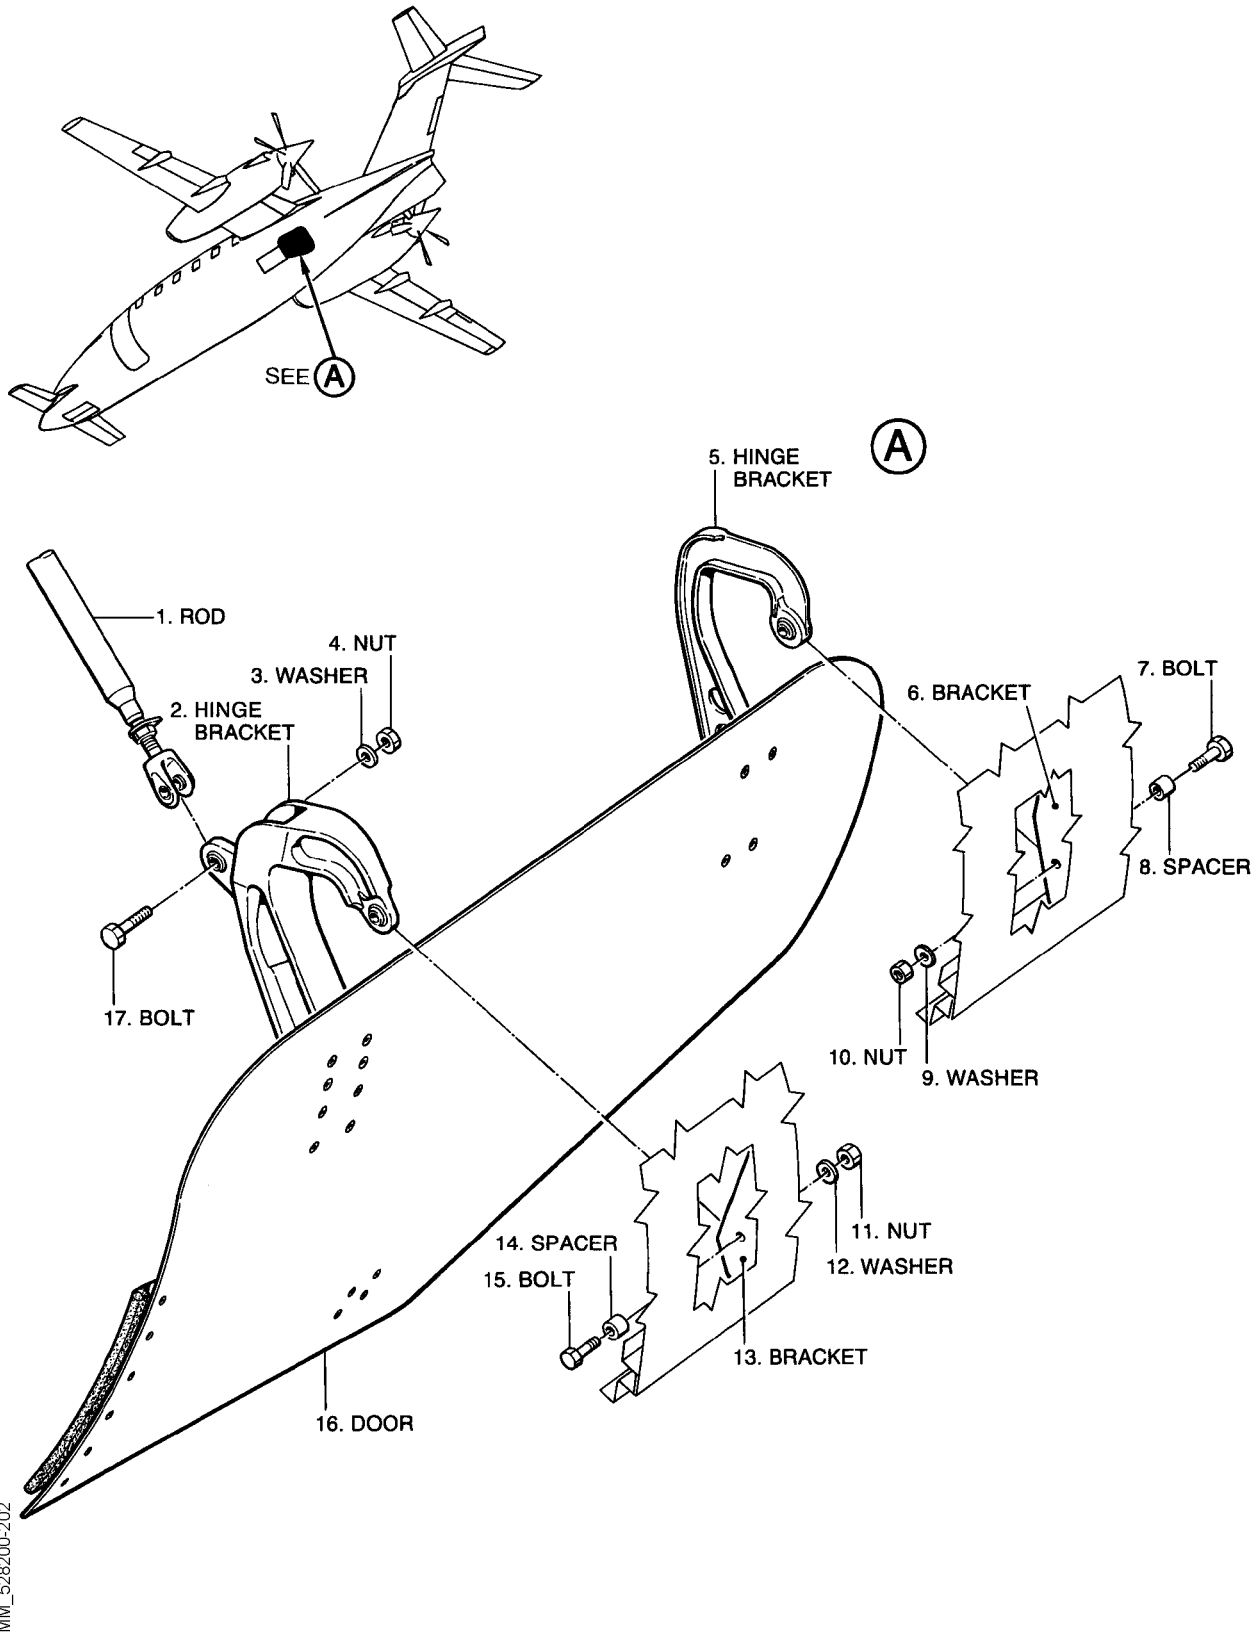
Main Landing Gear Rear Door - Removal/Installation
